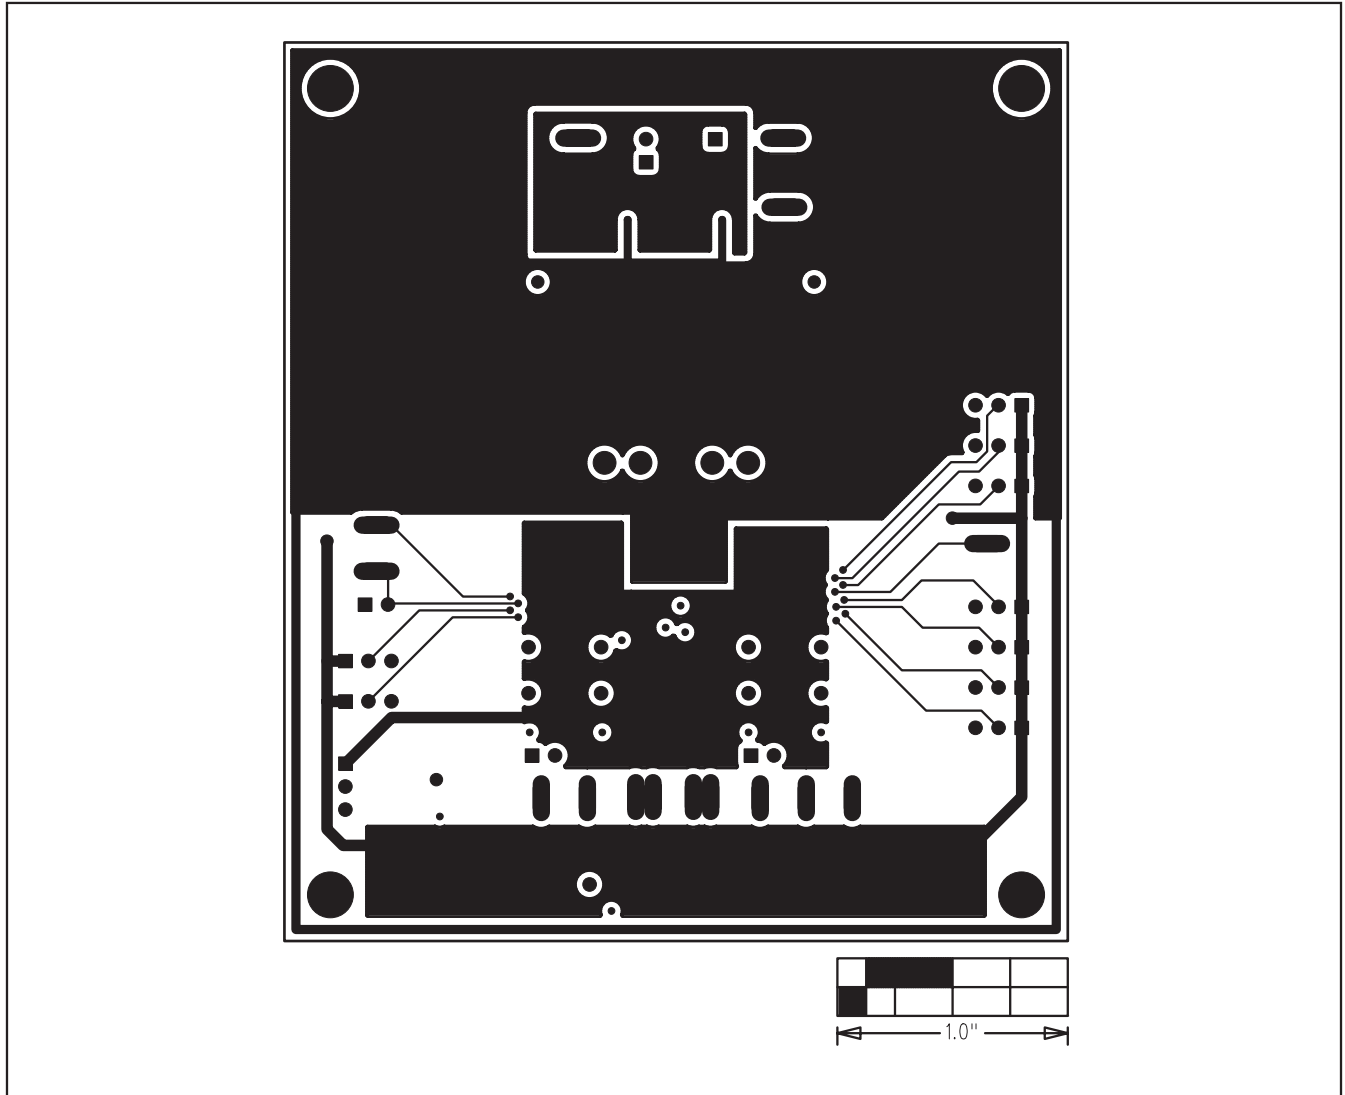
MAX9709 EV Kit PCB Layout—VDD Layer 3
